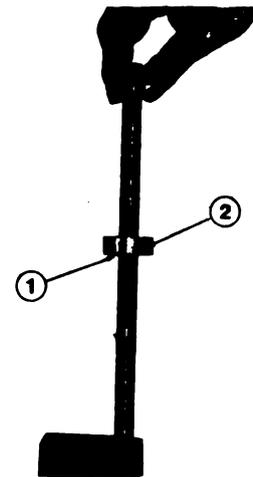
(V10188). Adjust The Collar On The Depth Gauge Rod.
